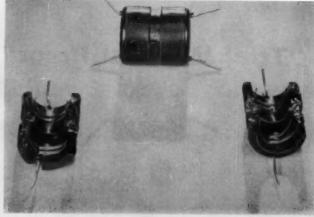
(below): Making a welded T-joint with a resistor fitting. First, the square-cut end of polyethylene tube is inserted in the fitting
